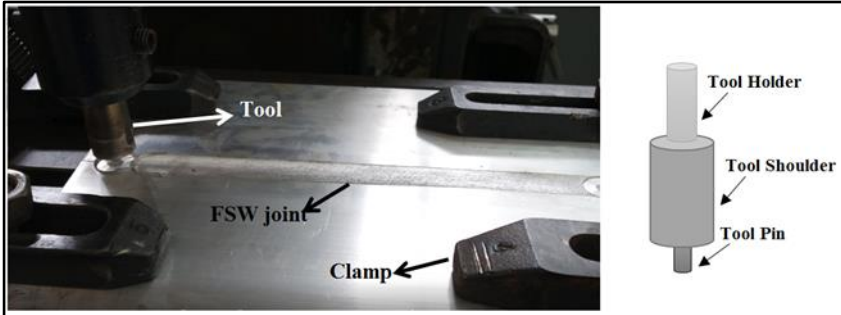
Friction stir welding process and Tool profile (a) Friction stir welding process, (b) Tool profile
